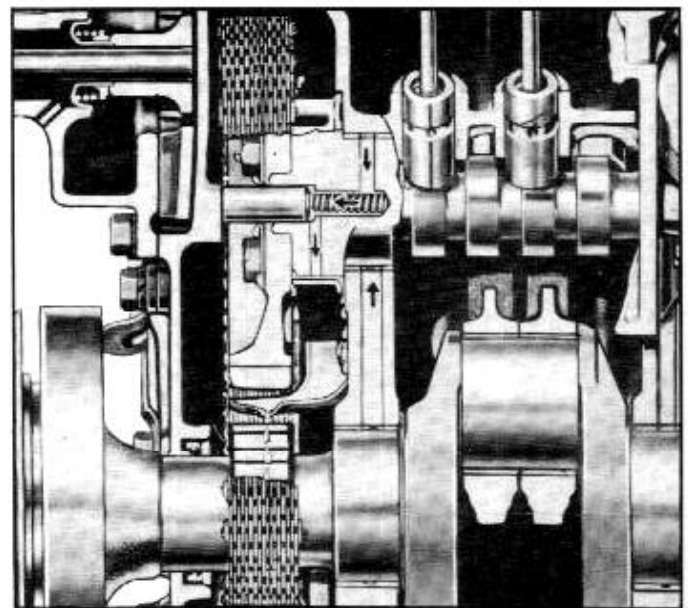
C-10—Lubrication of Camshaft End Thrust Plunger and Timing Chain
